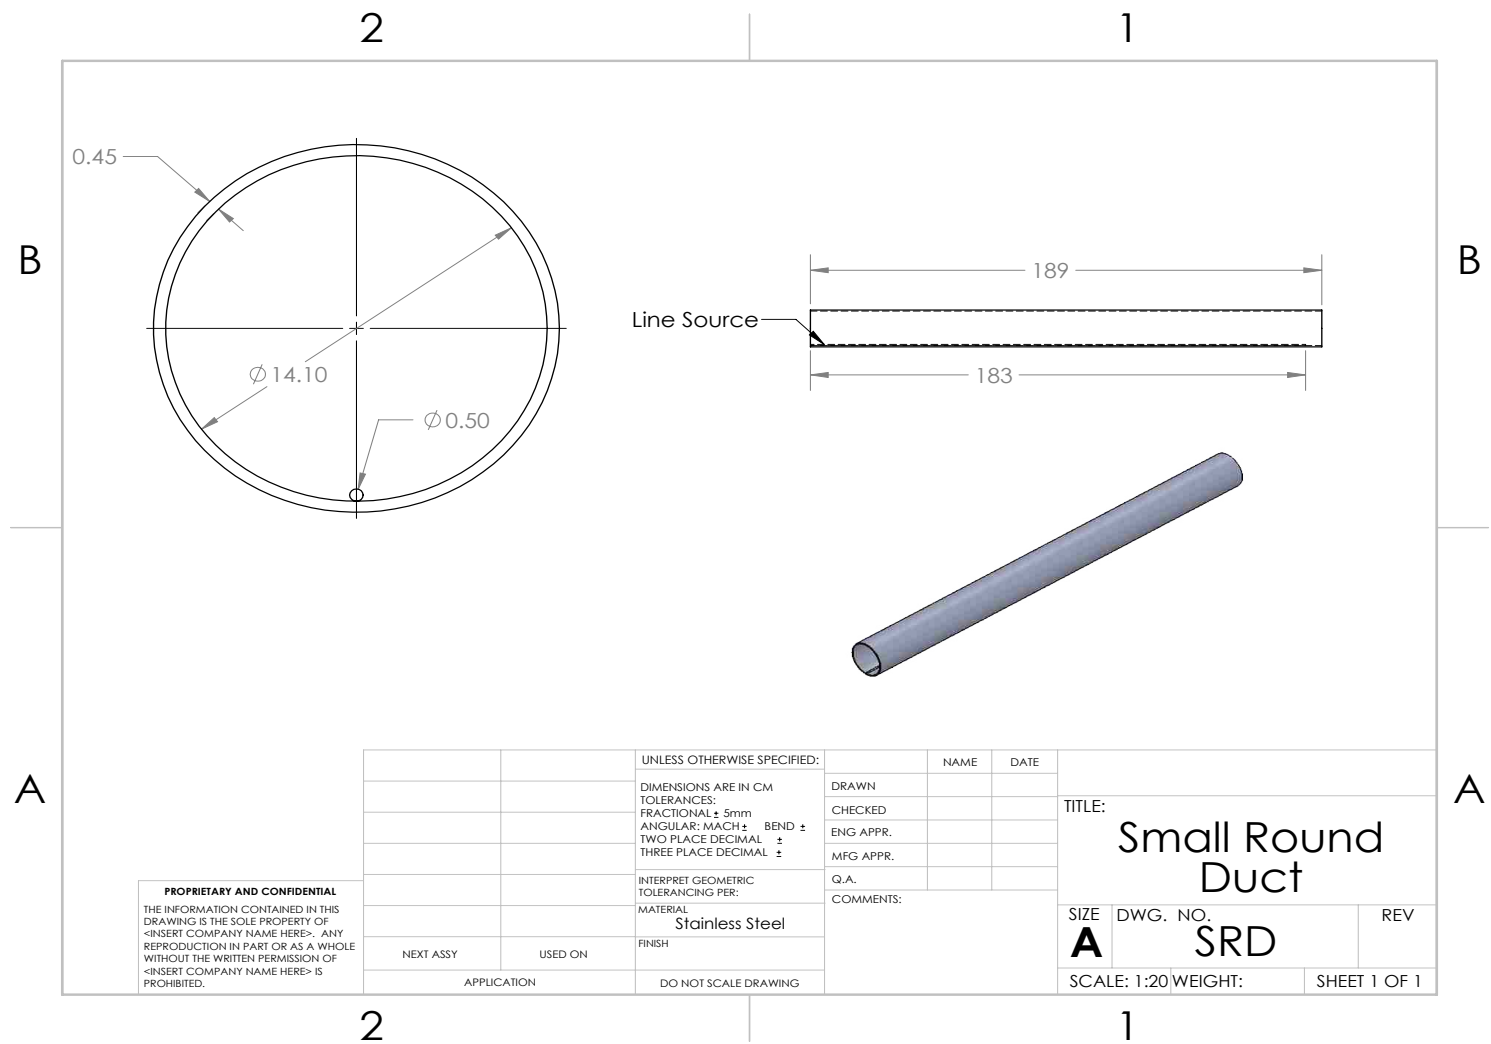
Drawing of the small round duct fixture with the appropriate dimensions.
